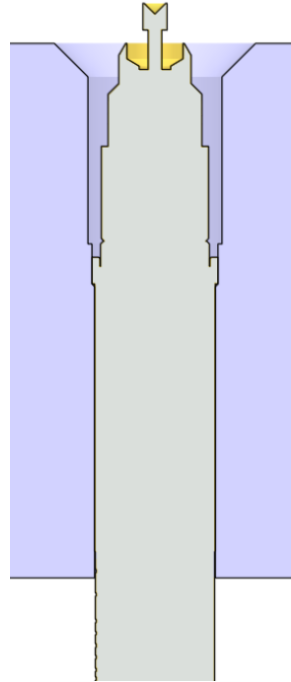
Illustration of how the connector is seated in two chamfered holes of the fixture for Test 5.
